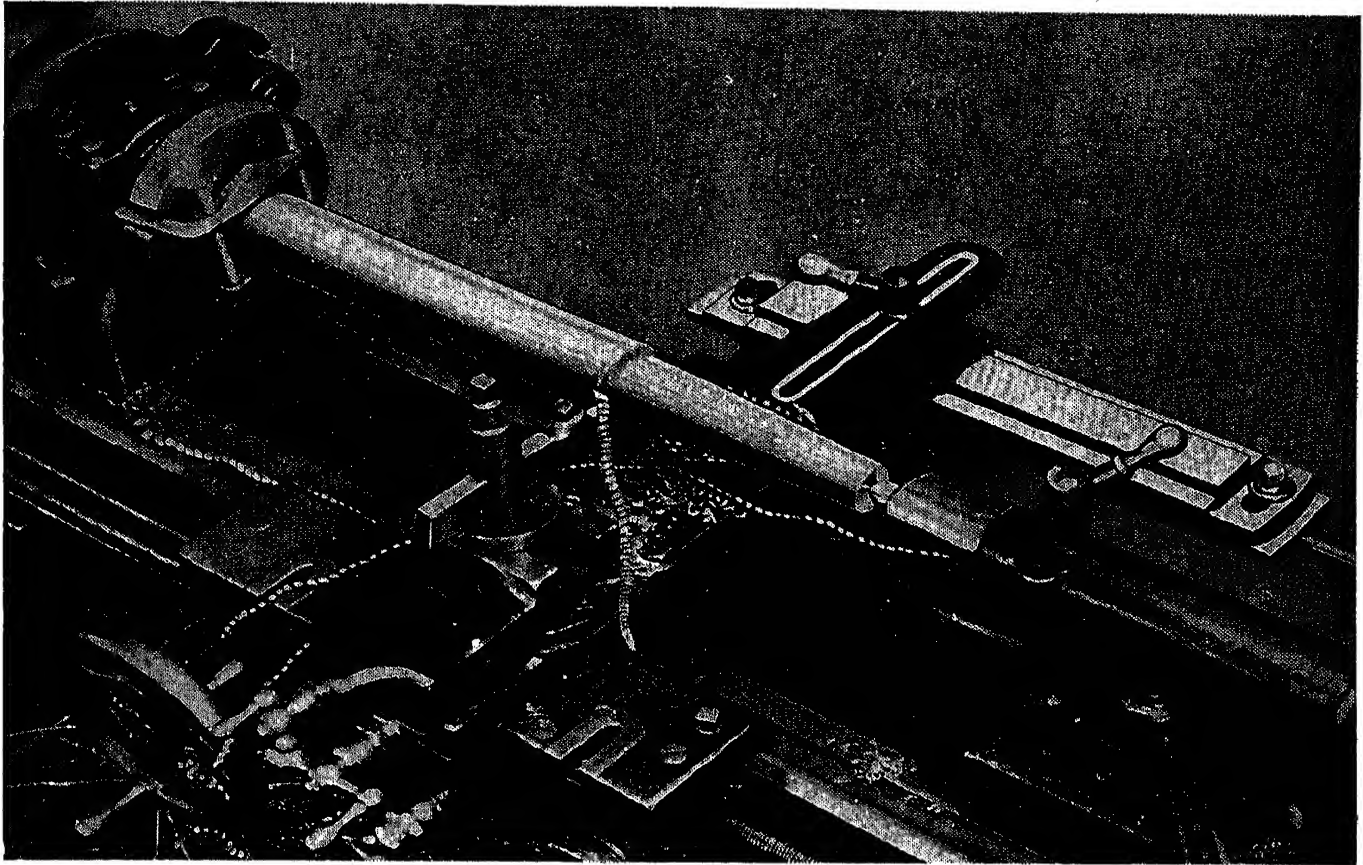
Taper turning with a taper attachment. (Courtesy South Bend Lathe Works.)
